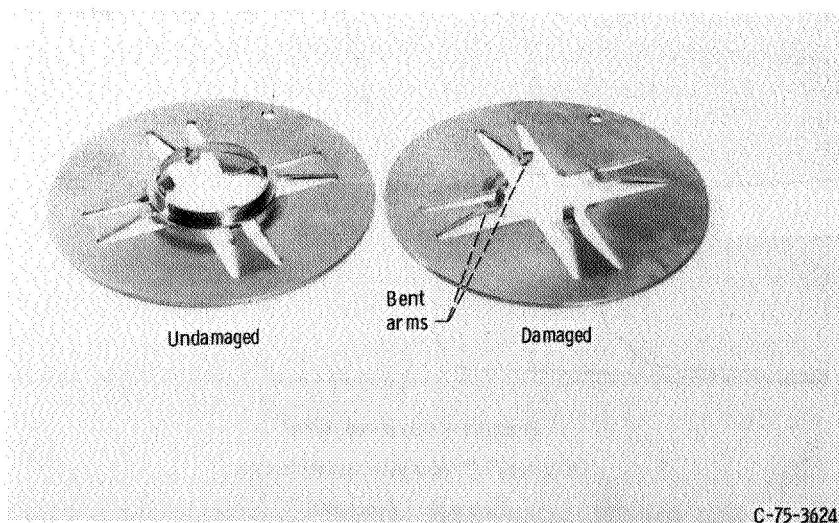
Undamaged and damaged arms that hold the spring-retainer ring.
